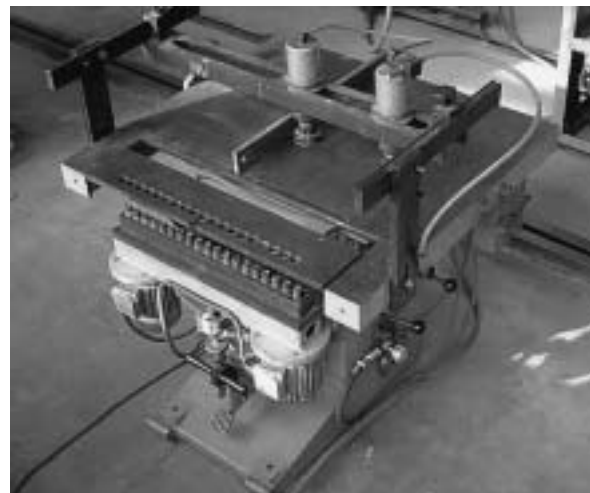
Cyclic multi-spindle drilling machine - type DCWGW-19
